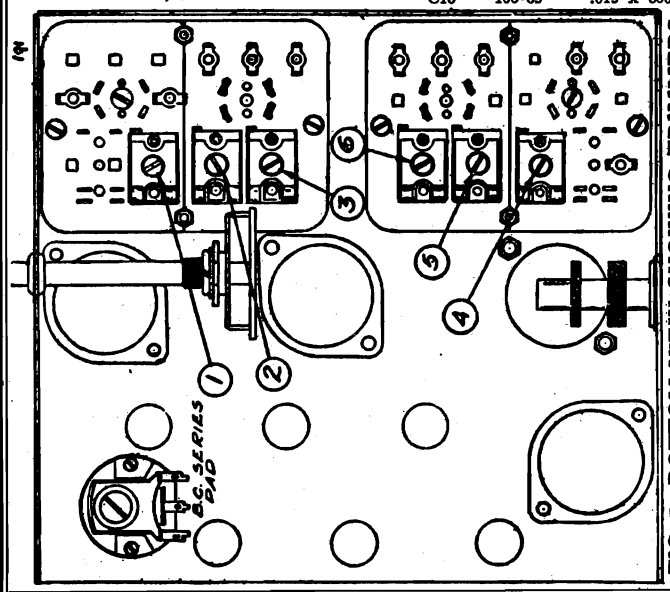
BOTTOM VIEW SHOWING TRIMMERS
